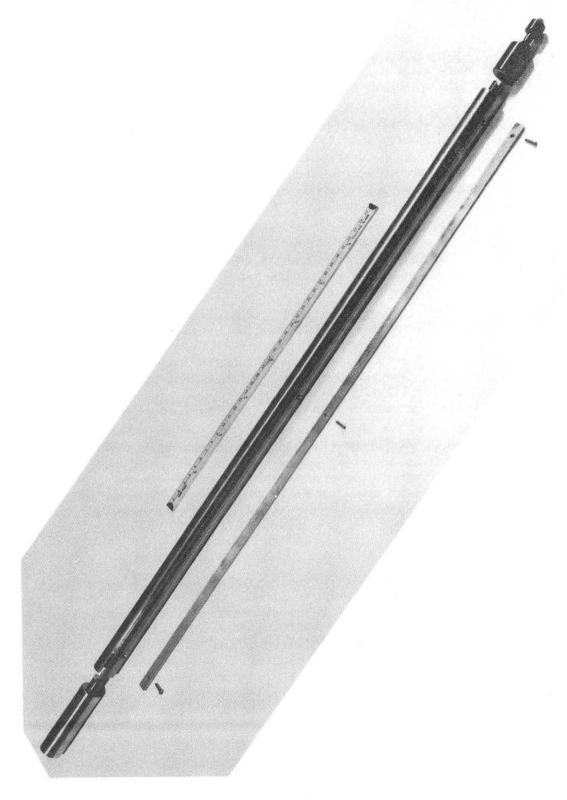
Sinker bar. Only one of the four weighting bars is shown.
